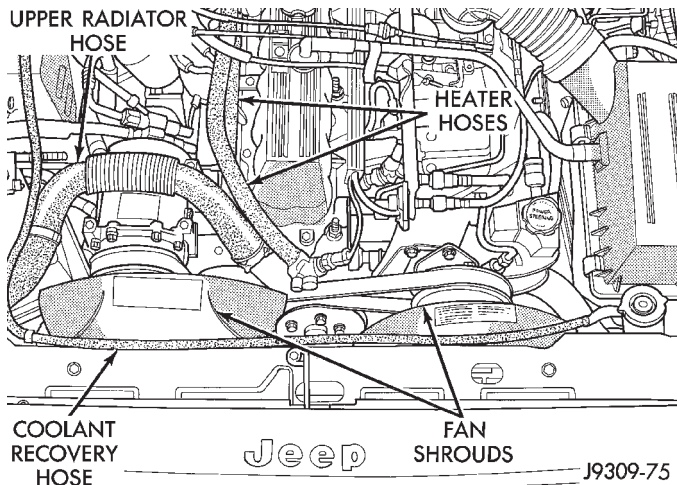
Upper Radiator Hose, Coolant Recovery Hose, Fan Shroud & Heater hoses
